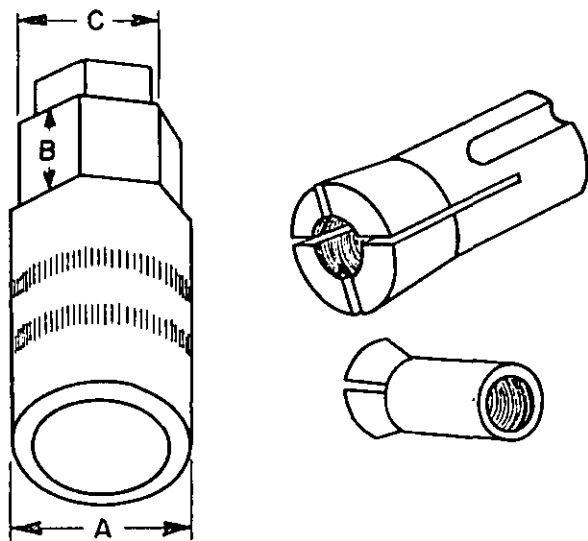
Type I, design A, sizes 1, 2, and 3, collet grip, housing with drawbolt, sizes 1, 2, and 3, medium, large, and extra large.
